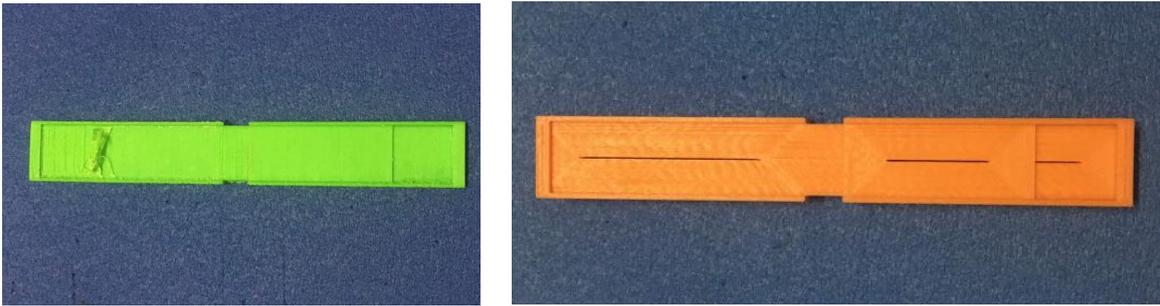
Second prototypes of jig with improper surface finish and presence of gap
